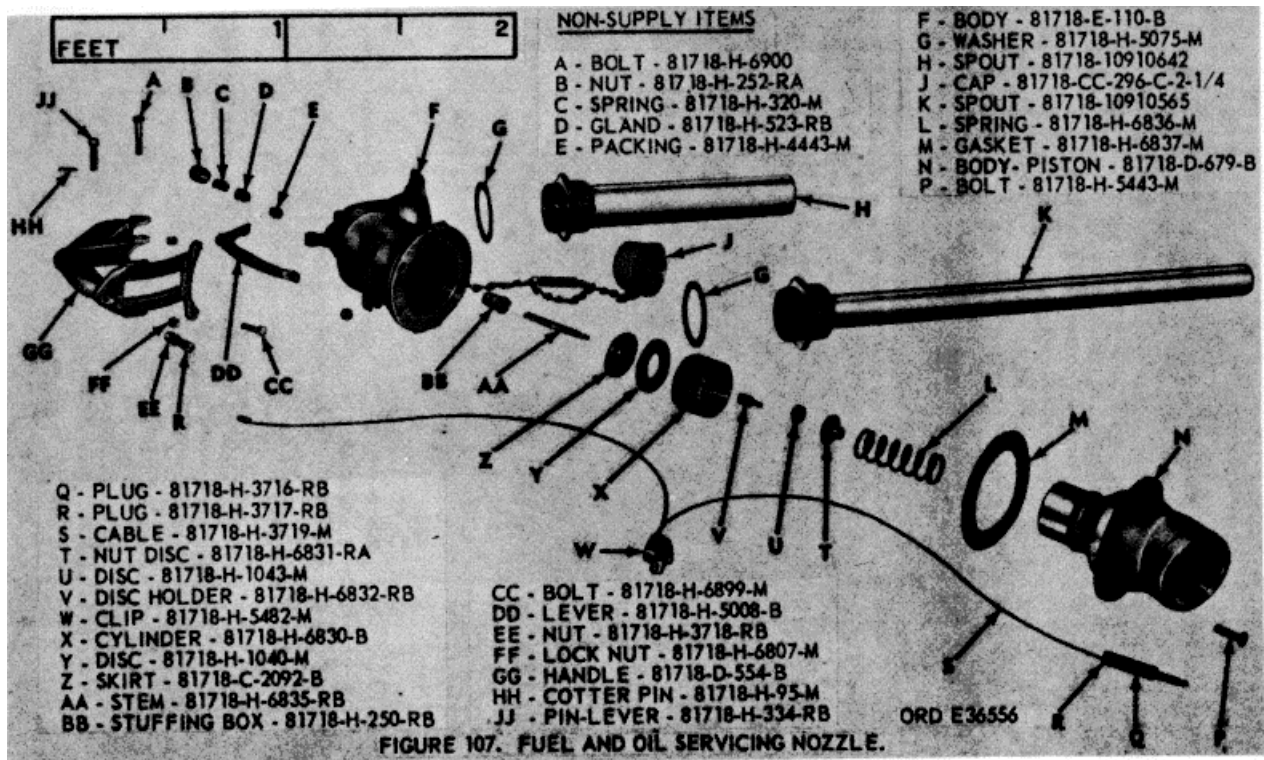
FUEL AND OIL SERVICING NOZZLE.
